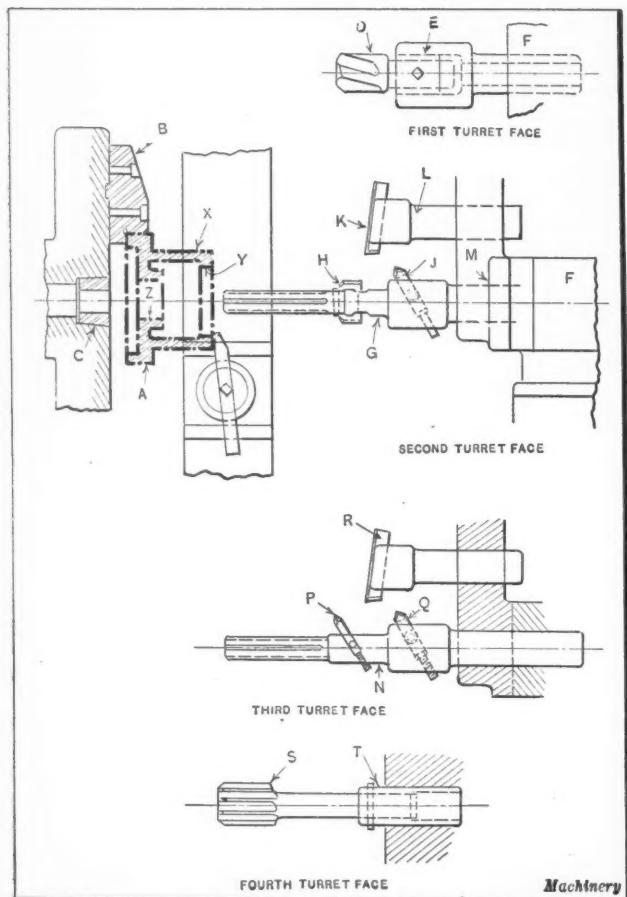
Tool Lay-out for Boring, Turning, and Reaming Operations on a Turret Lathe
